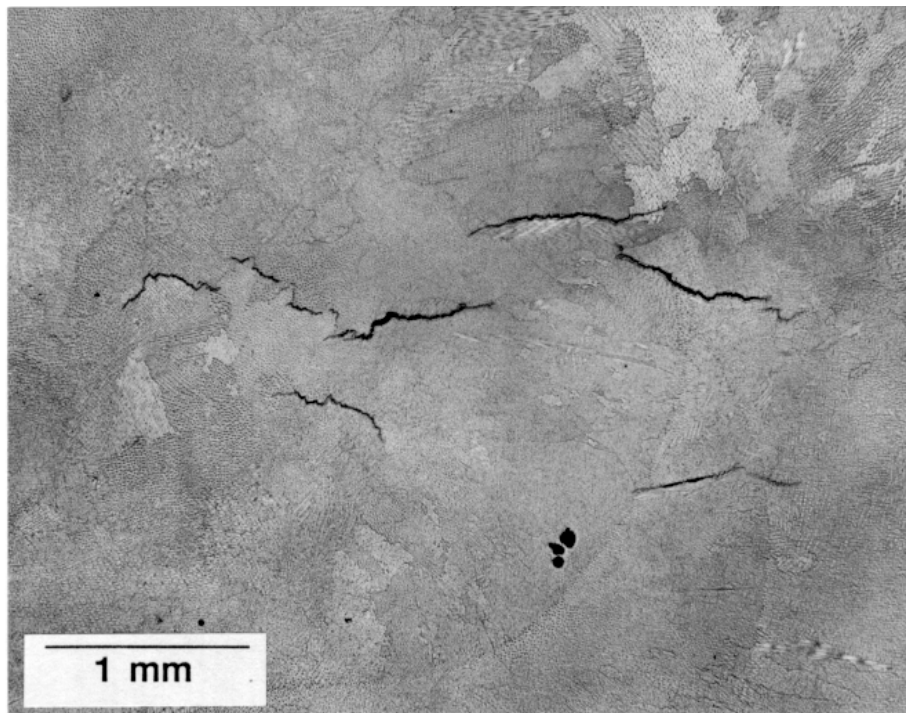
DEFECT TYPES OBSERVED IN RETIRED COMPRESSOR REAR FRAMES:
